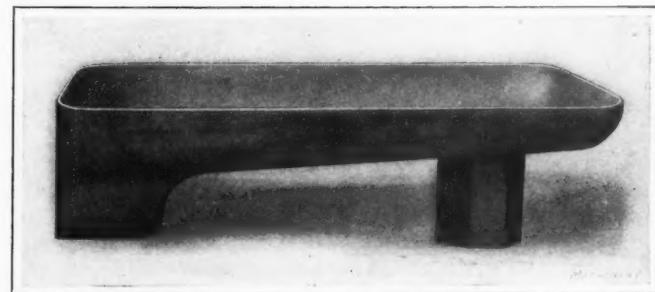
Aluminum Pattern which produces Perfect Pan Castings
